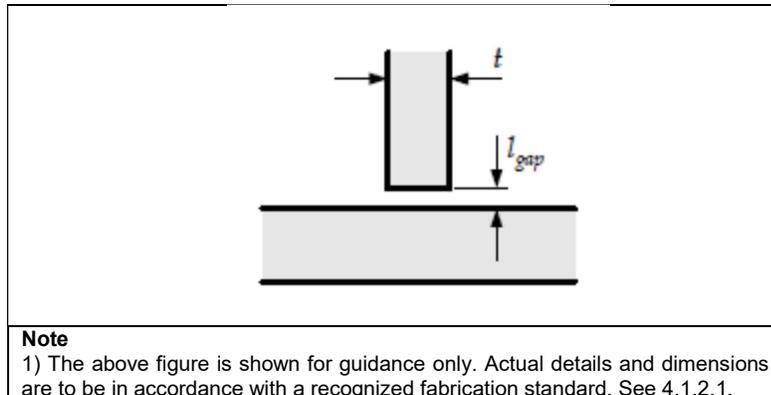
Typical Tee or Cross Joint Fillet Welds
